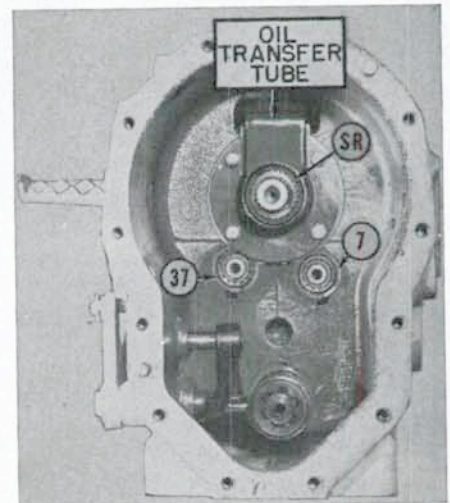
View into rear end of D-14 and D-15 tube showing the snap ring (7) which must be removed in order to remove the PTO idler gear.
